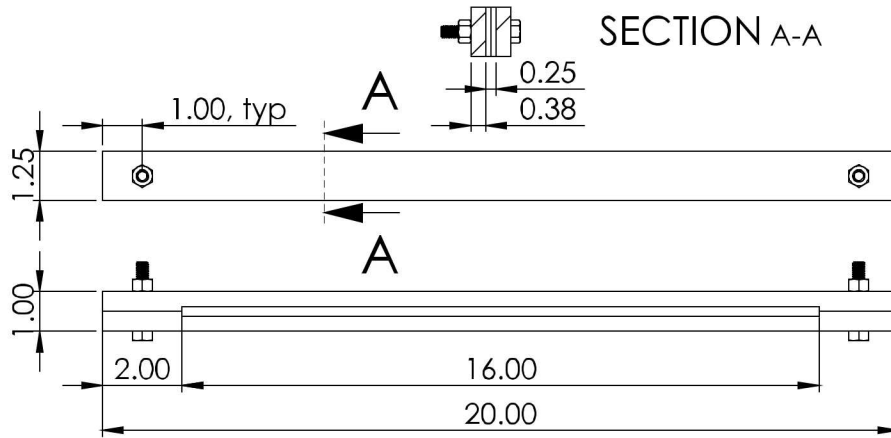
Assembly of bolted, symmetric c-beams (dimensions in inches).
